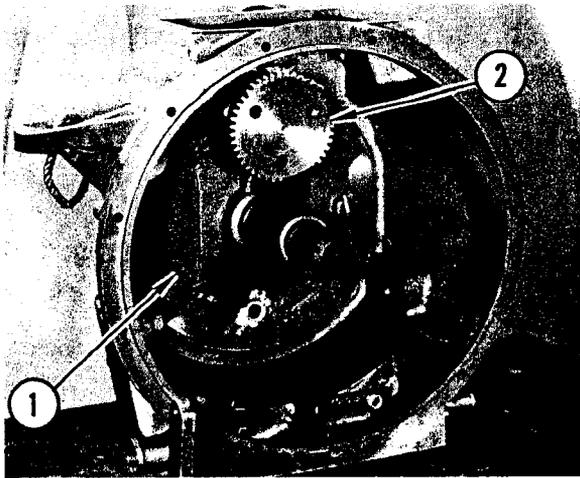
RELEASE BEARING SUPPORT INSTALLED
